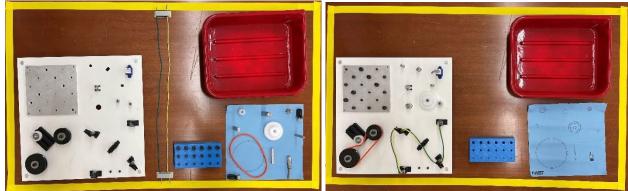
Subtask 1 – Assembly. This subtask starts with a fully disassembled task board with parts placed on kit layout template and fasteners and wires placed in a dispensing mechanism (a). Completion results in a fully assembled task board (b)
